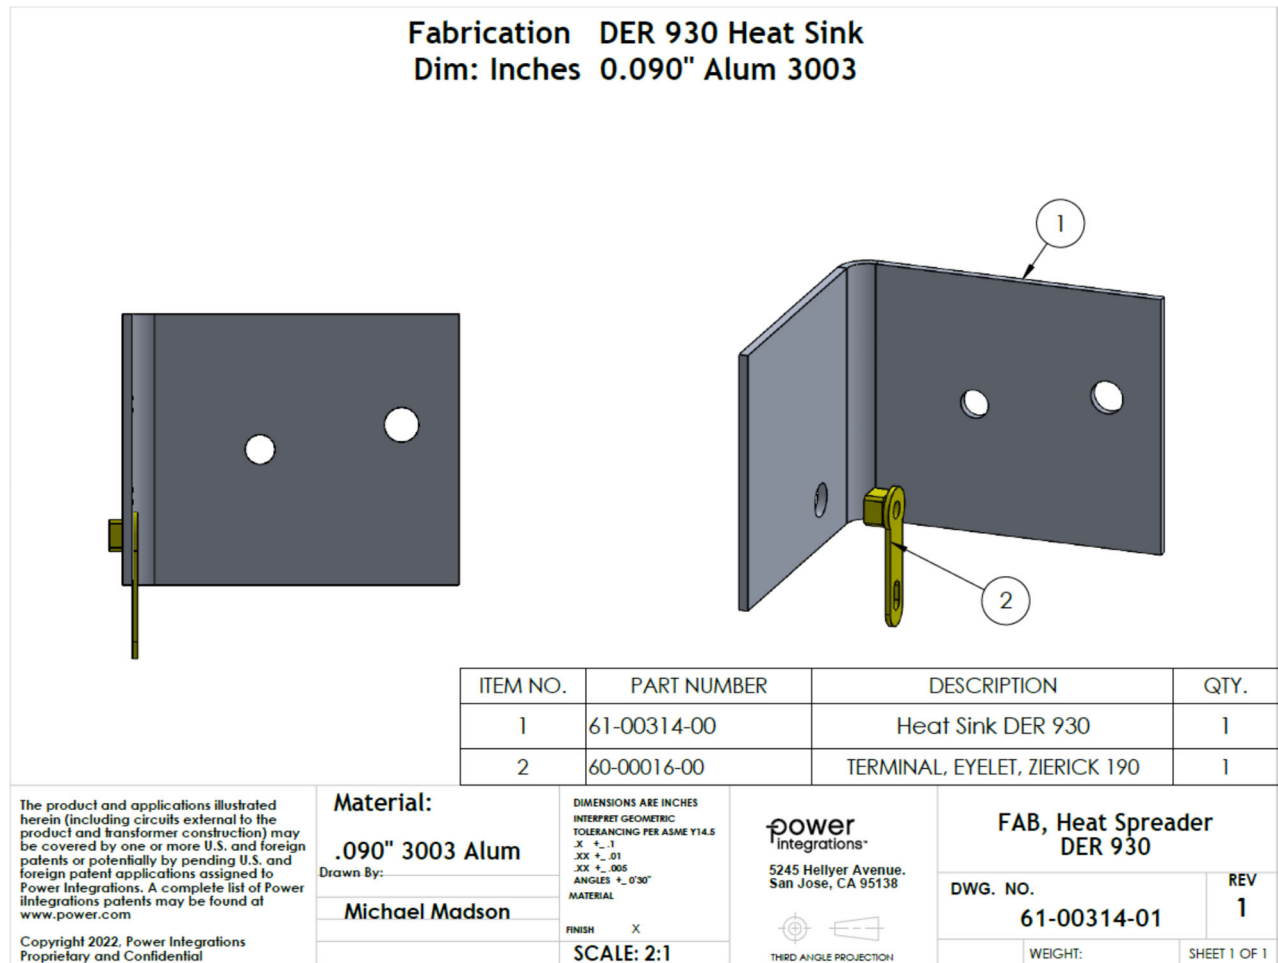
Bridge Rectifier and PFC Boost Diode Heat Sink Fabrication Drawing.
